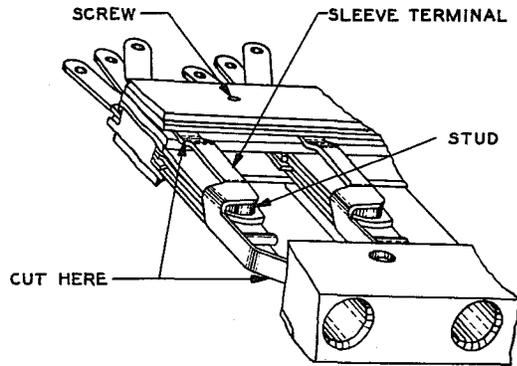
Points at Which To Cut Sleeve Terminals in 92- and 292-type Jacks
